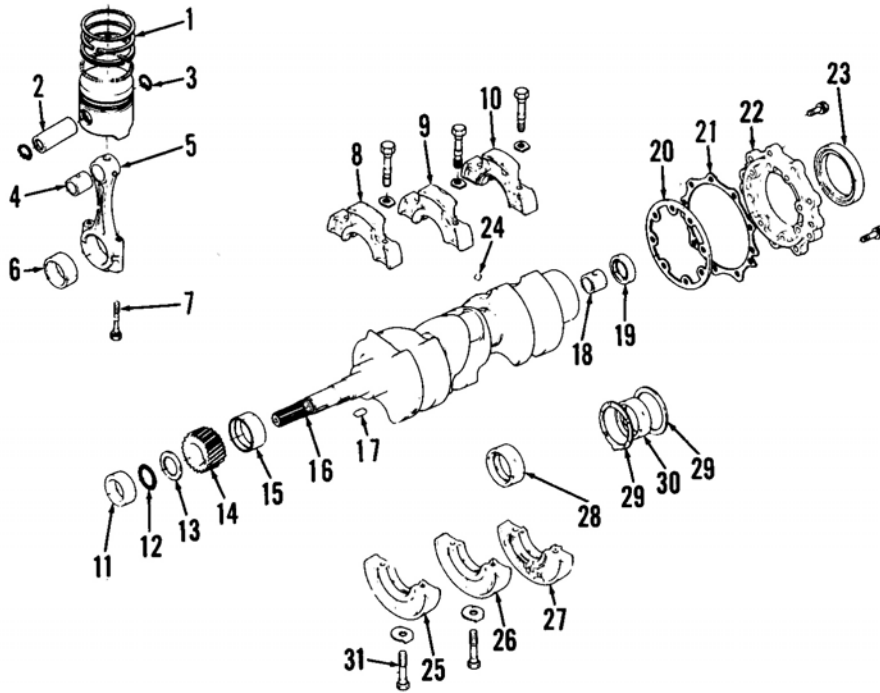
Exploded view of piston, rod and crankshaft assembly.
